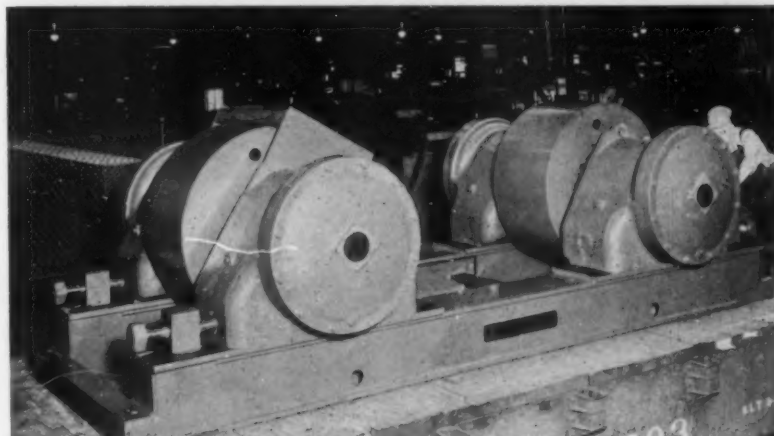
Kiln carrying mechanism made with forged steel rollers and shaft
